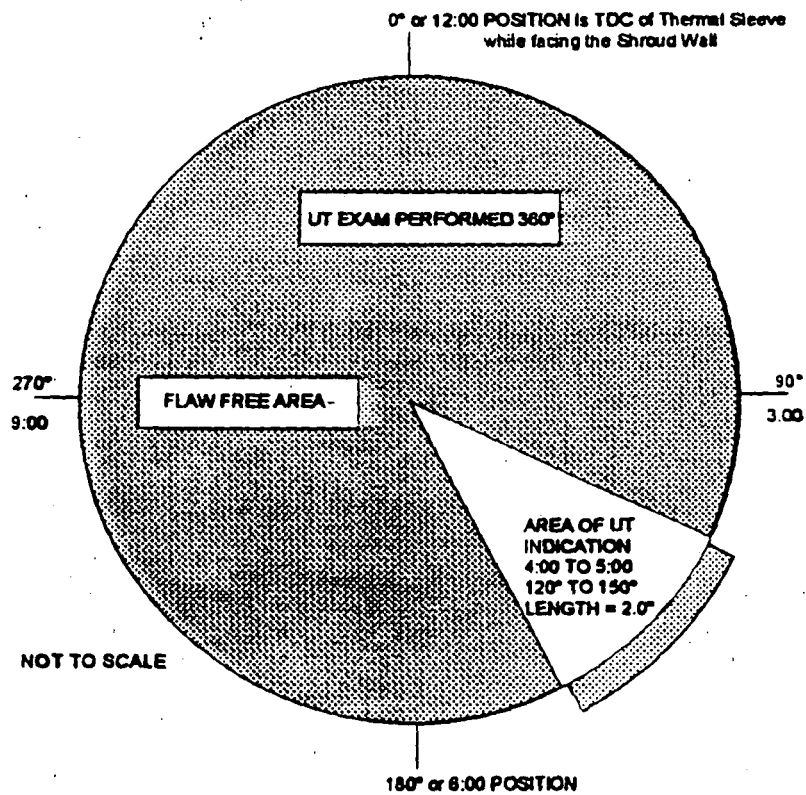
Ultrasonic Testing Examination Area And Flaw Location Thermal Sleeve Weld 18
